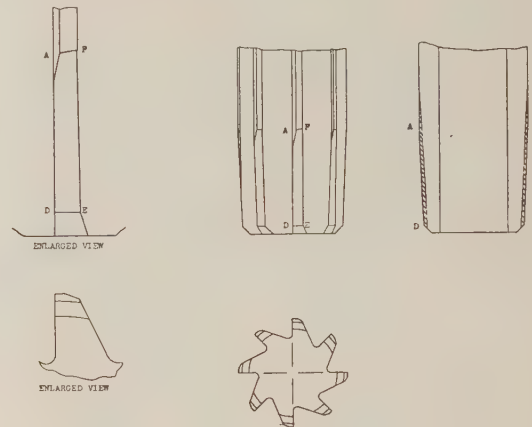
SHARPENING OF HAND-REAMER POINT CUTTING EDGE
